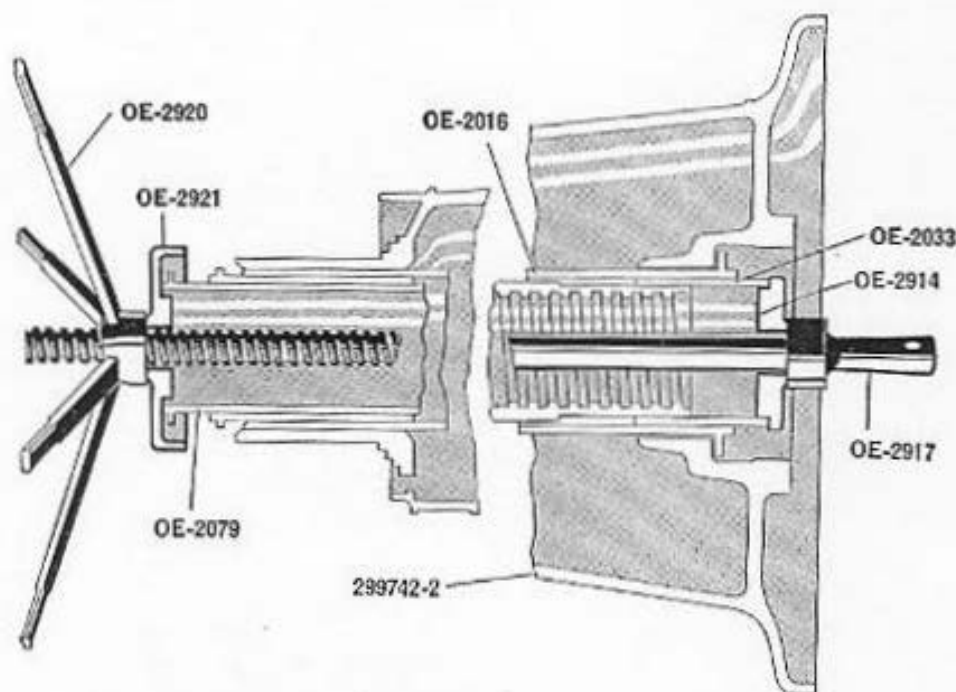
Assembling column lower bearing bushing (OE-2033) into column guide bushing (OE-2016)
